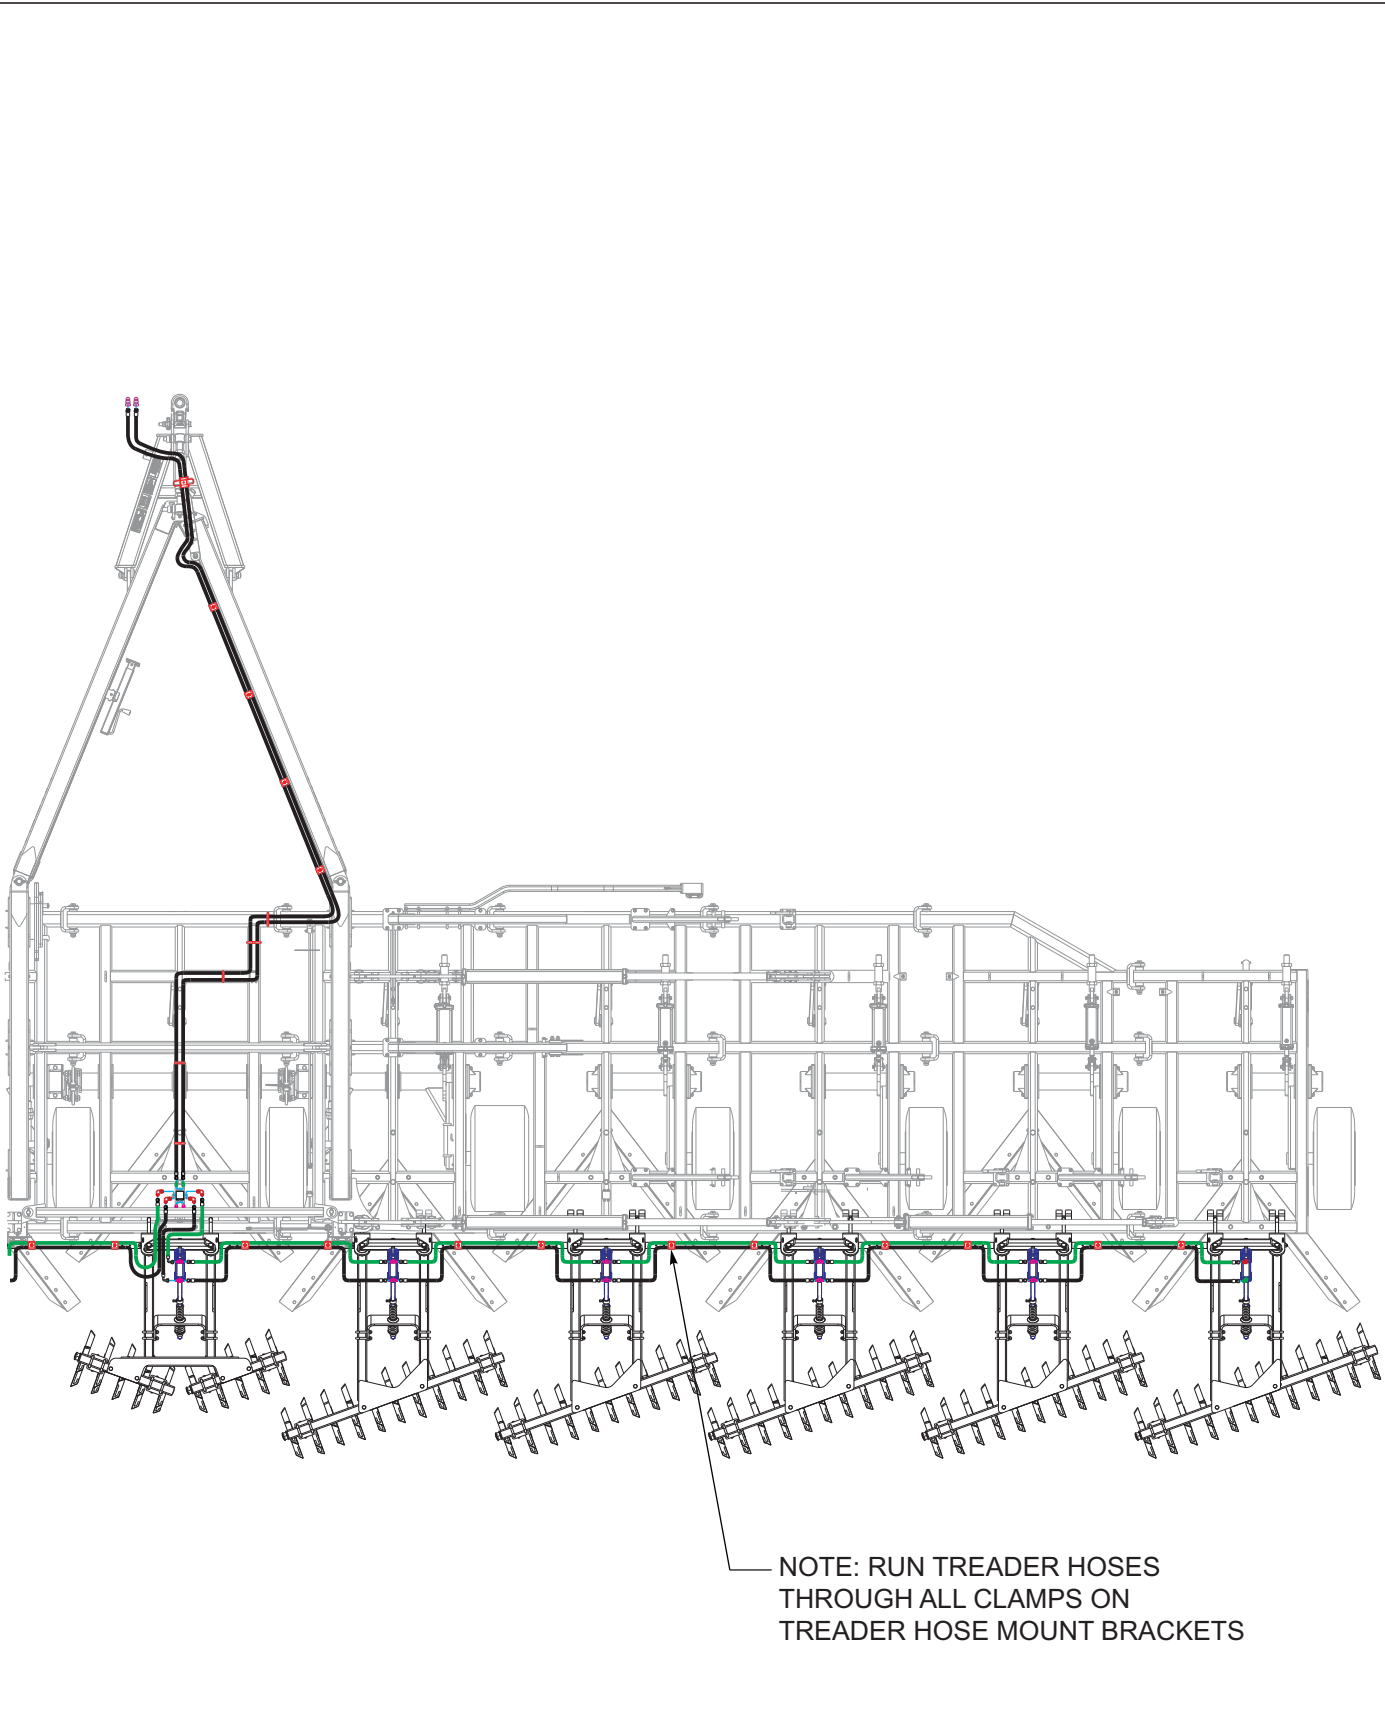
Treader Hydraulic Layout RH 1710-64'
